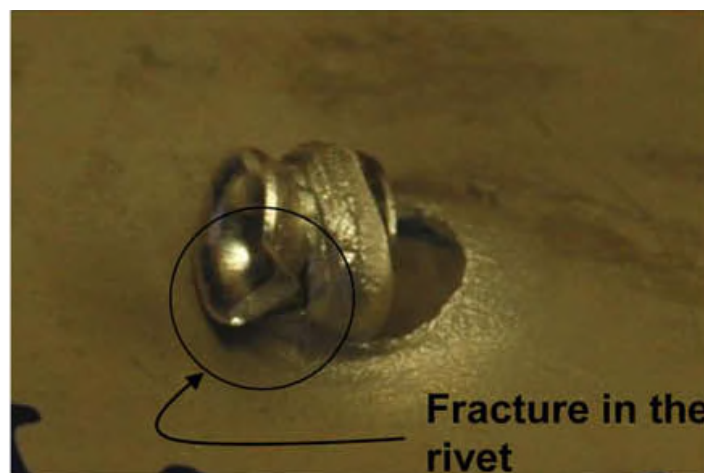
A fracture in the rivet in a joint with an aluminium alloy rivet after the pure shear test [43].
